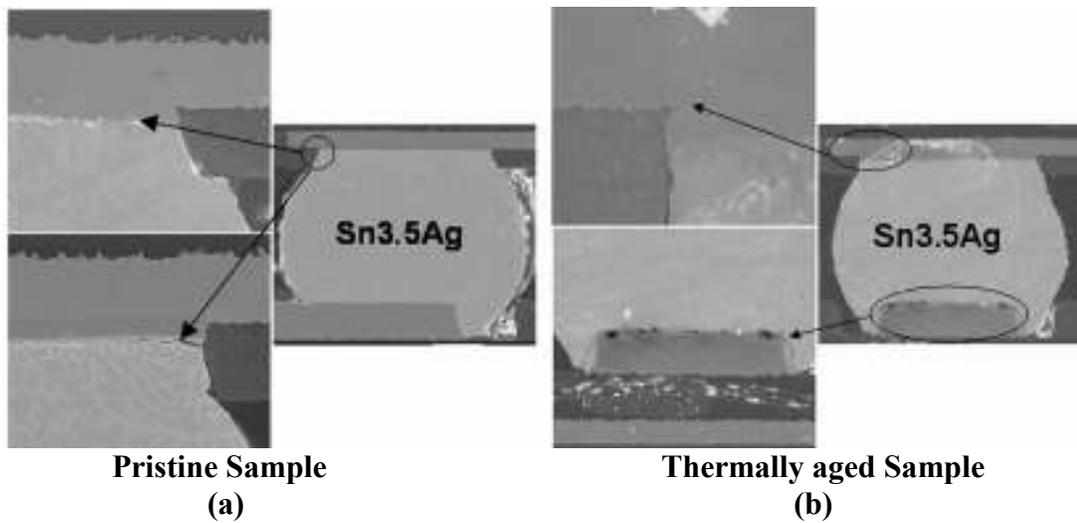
Failure Modes observed in solder joints for Sn3.5Ag
